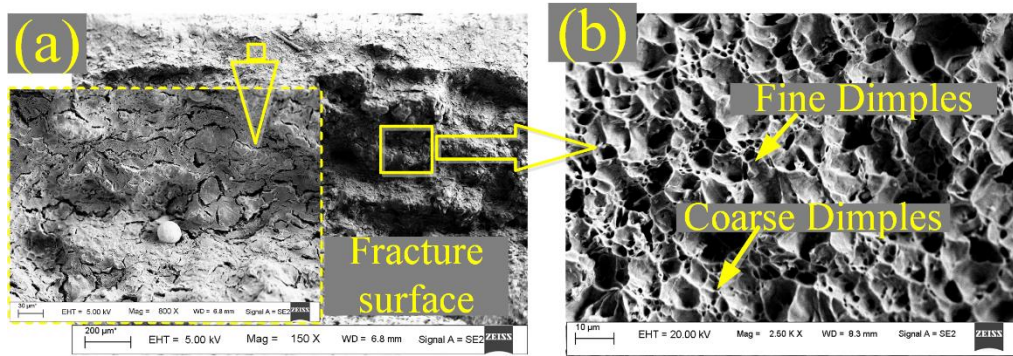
FESEM image of the fractured tensile surface of weld 5: (a) micro cracks were observed at low magnification, and (b) high magnification showing a cluster of fine dimples along with coarse dimples
